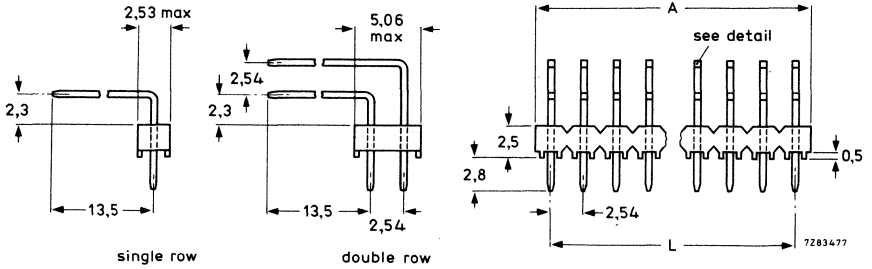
Male header with 90° angled pins; see Table 4 for dimensions A and L.
